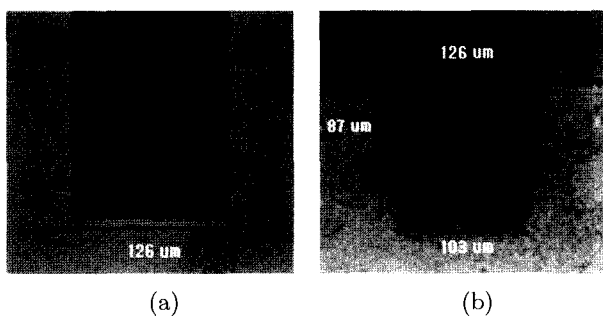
Machined U-groove; (a) top view, (b) side view.
